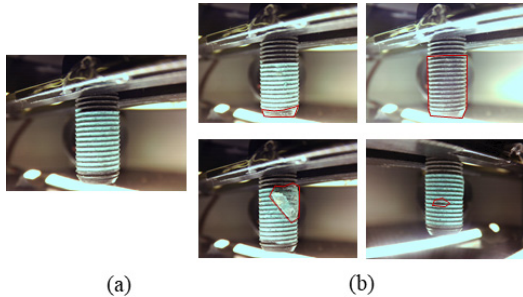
Examples of bolts with (a) good and (b) defective coatings
